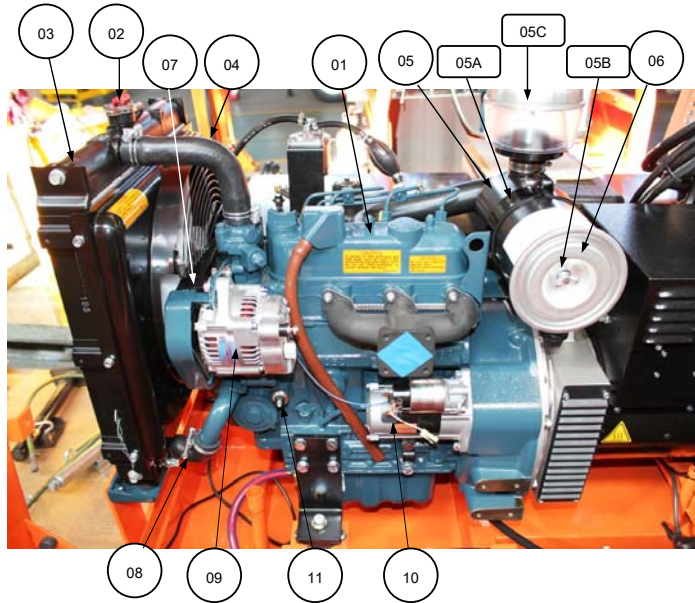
RIGHT SIDE VIEW – PARTS LIST KUBOTA D905 ENGINE
